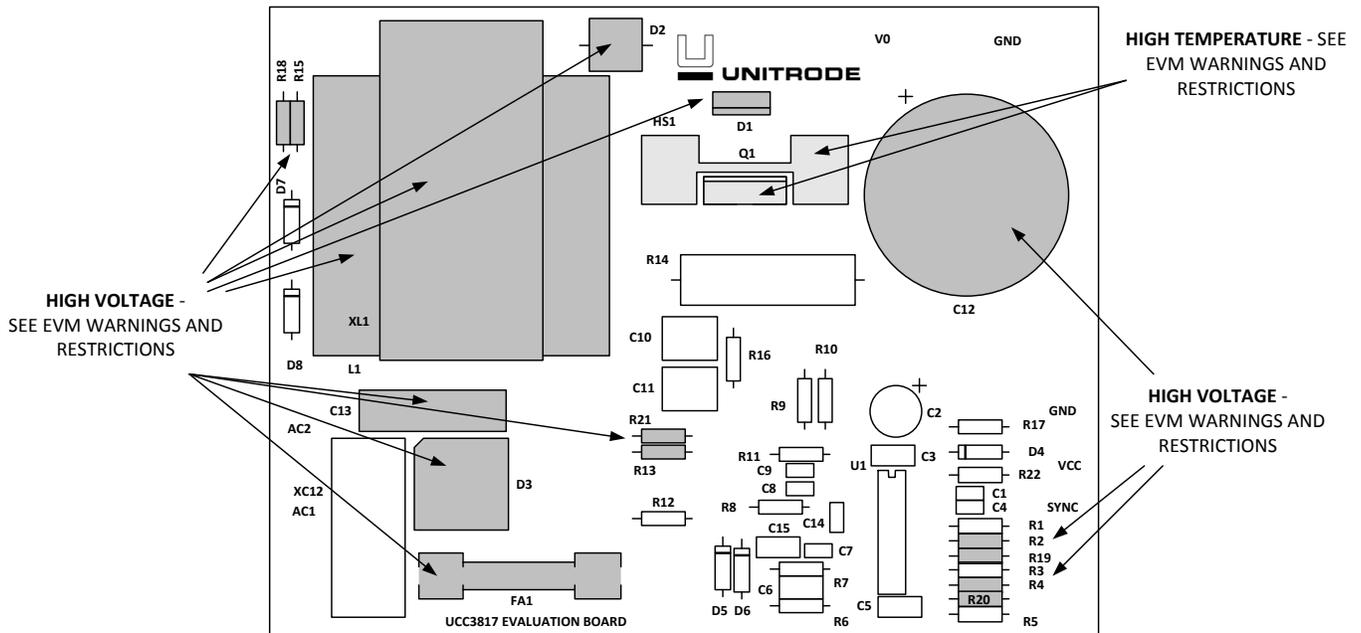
UCC3817EVM Evaluation Board Layout Assembly
